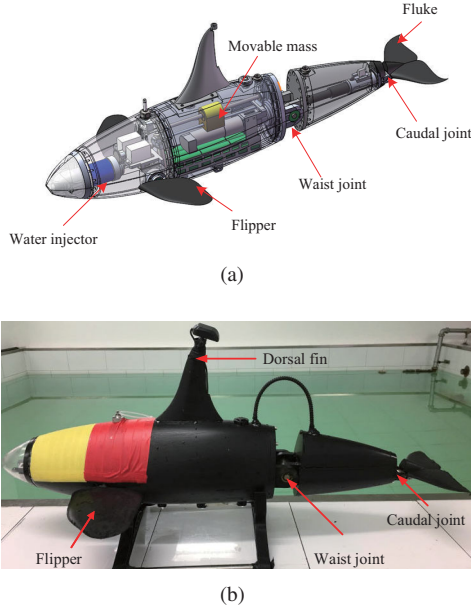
Illustration of the gliding robotic dolphin. (a) Mechanical structure. (b) Prototype.
